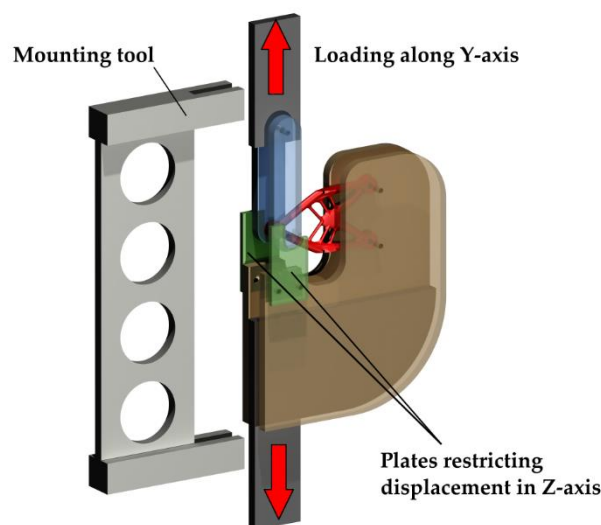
Loading scheme of and special mechanical testing equipment for bracket testing.
